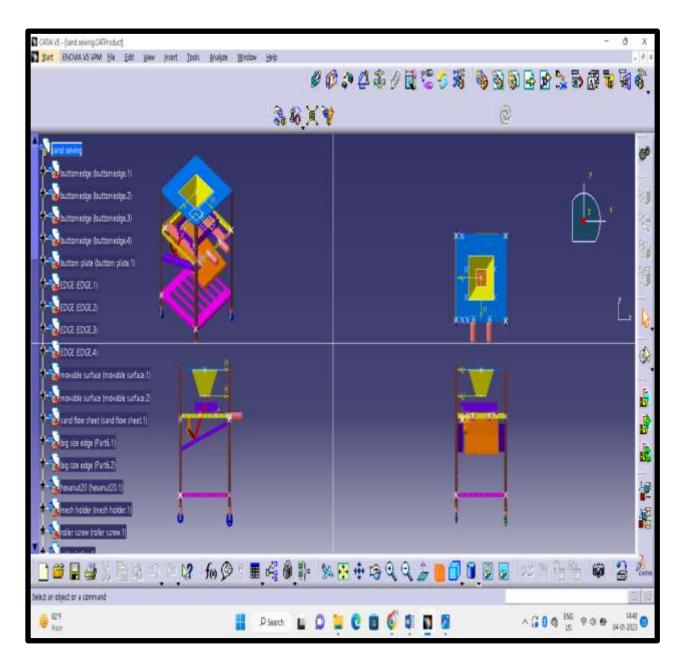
MULTI VIEW SAND FILTER MACHINE
